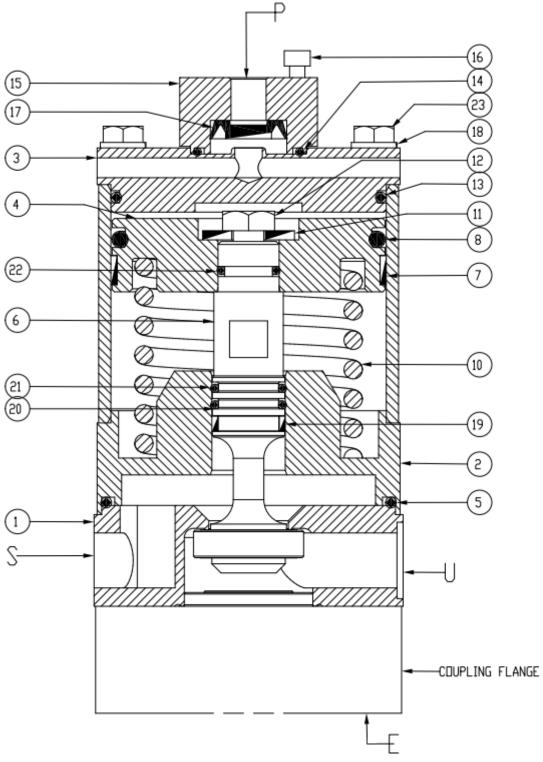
CO 3 way pneumatic valve size 1" 1/2: stainless steel machining
